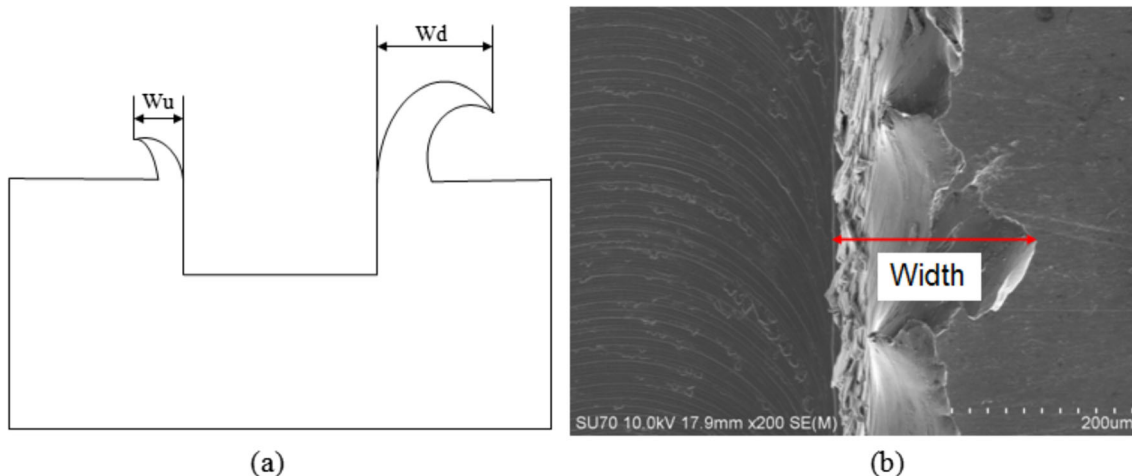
a Schematic of burr size on both up-milling and down-milling sides. b Measurement of burr width in SEM image
